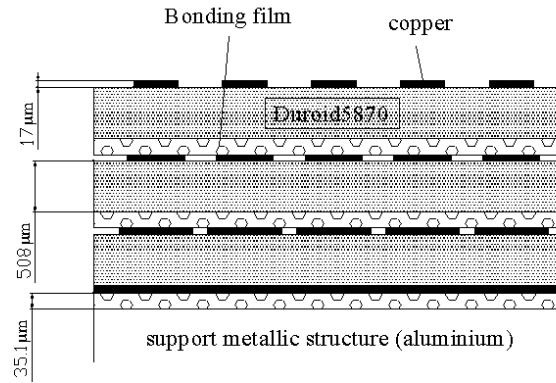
Cross-sectional view of the 3-layer structure used for the implemented reflectarray.
